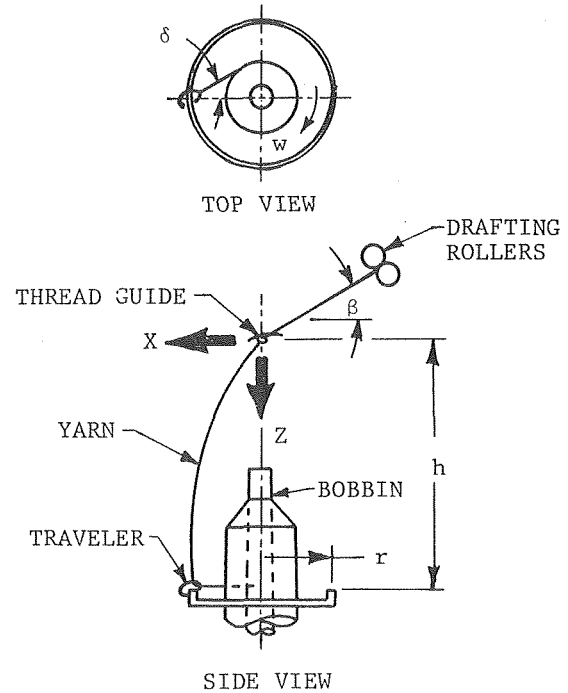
Definition of Geometric Parameters for a Typical Ring Spinning Machine
